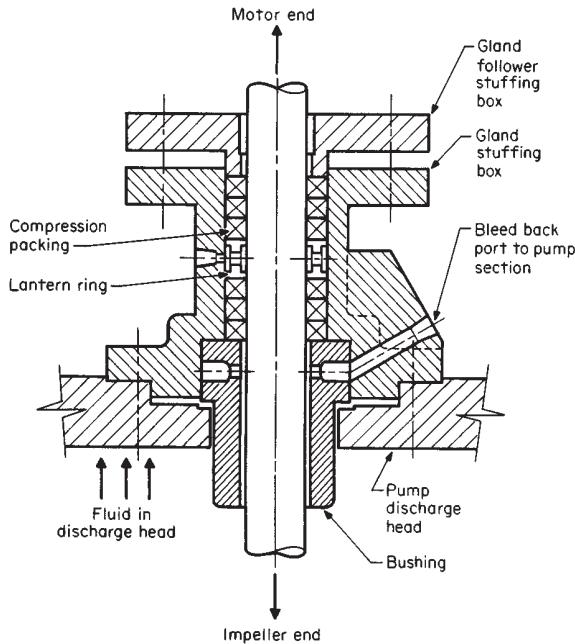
Seal cage or lantern ring. (*Courtesy of Crane Packing Co.*)
